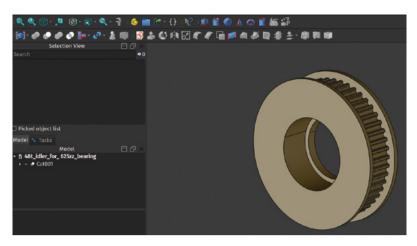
🛮 Using the FreeCAD Gear workbench addon makes creating custom GT2 pulleys and gear wheels a breeze
